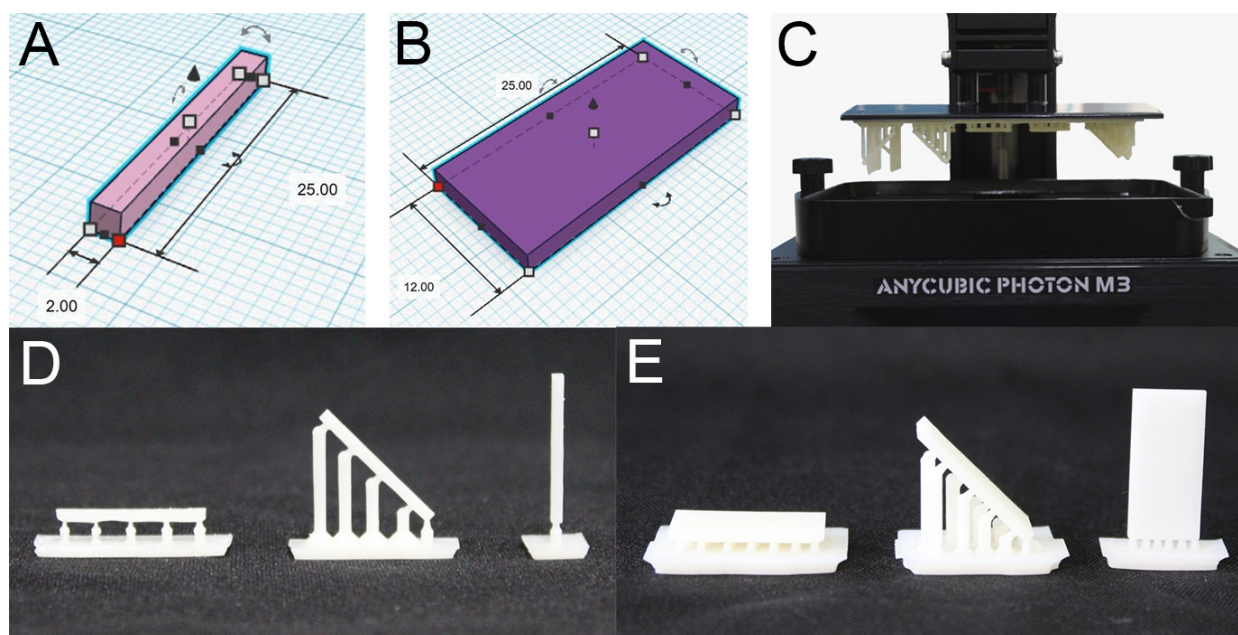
(A) and (B) CAD design of the specimens; (C) Printing of the specimens; (D) Bar specimens with 0° , 45° , and 90° angles; (E) Block specimens with 0° , 45° , and 90° angles. Source: Authors.
